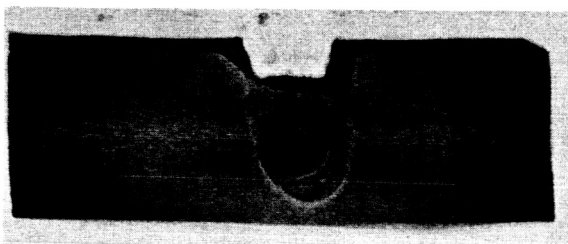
BEAD CROSS SECTIONS WITH 60° V-GROOVE.
